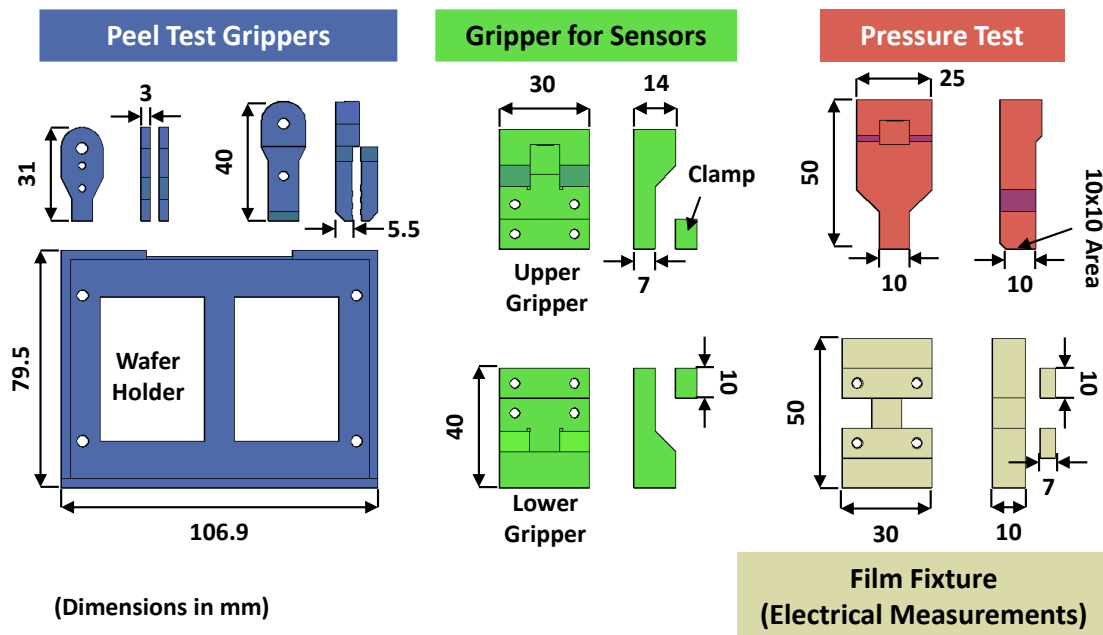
Gripper designs and other tools for 3D printing manufacturing.
